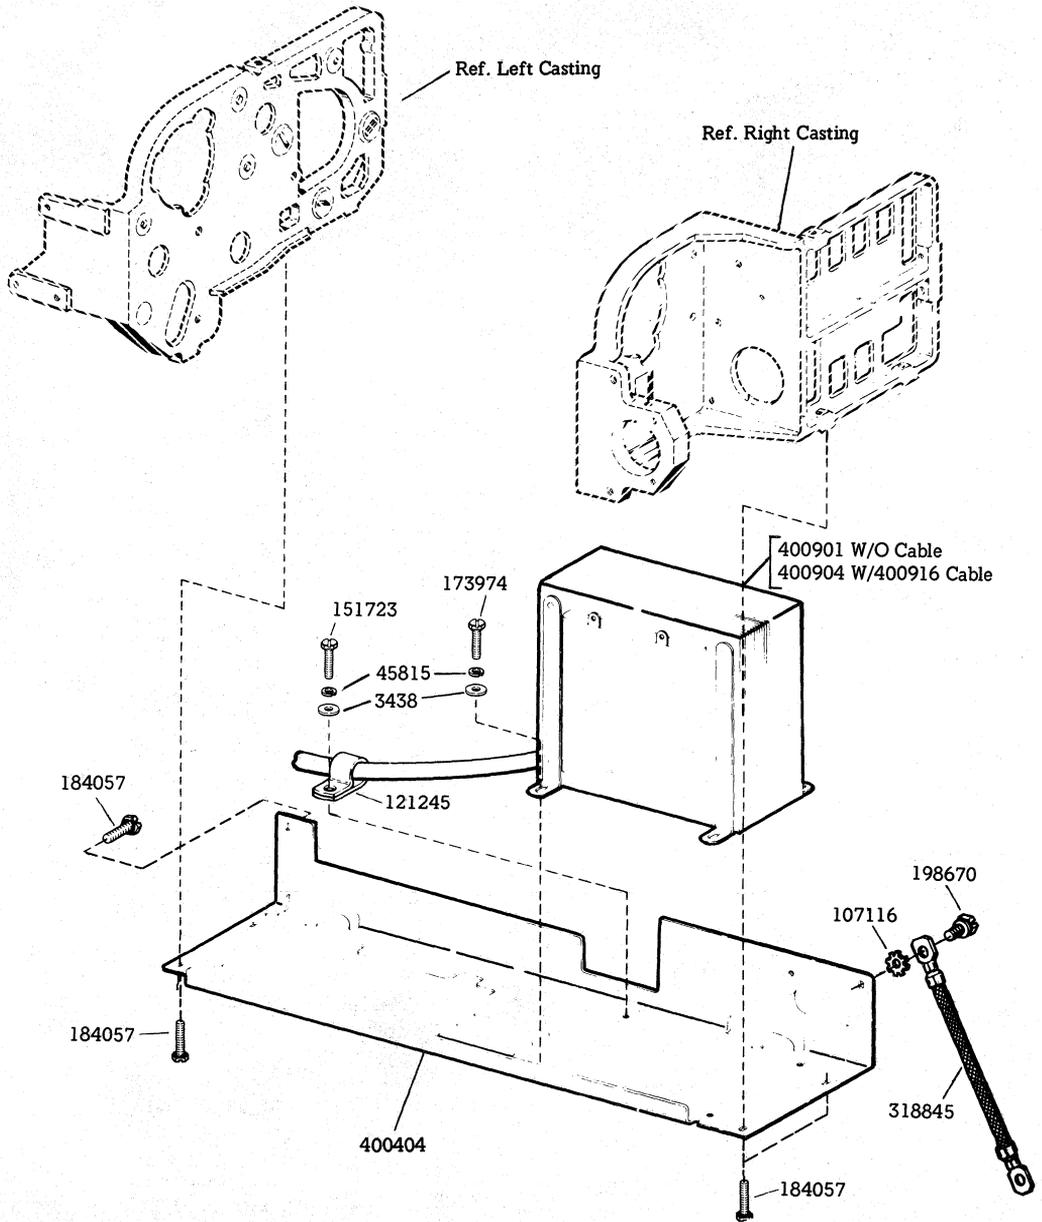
Bottom Pan and Transformer (Friction Feed Only)
